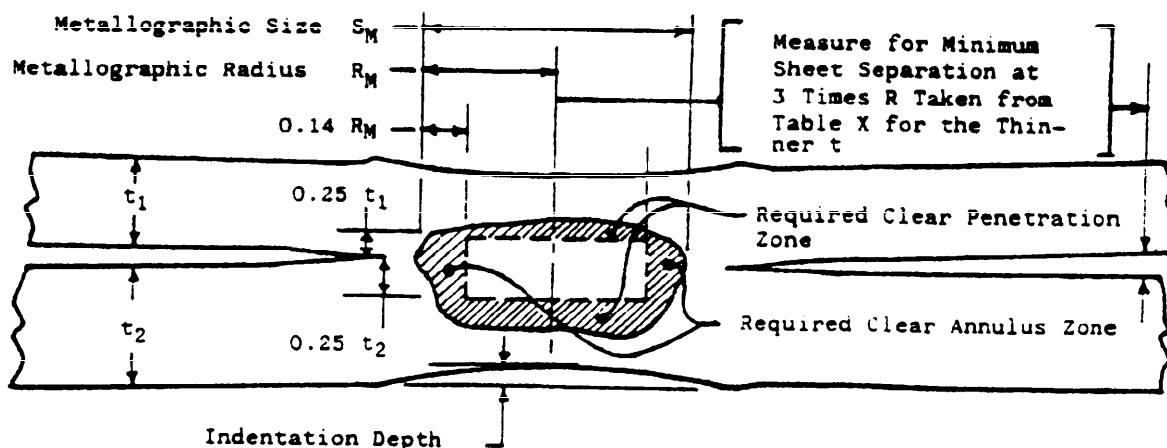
Nomenclature for metallographic spot weld sections and seam weld transverse sections.
